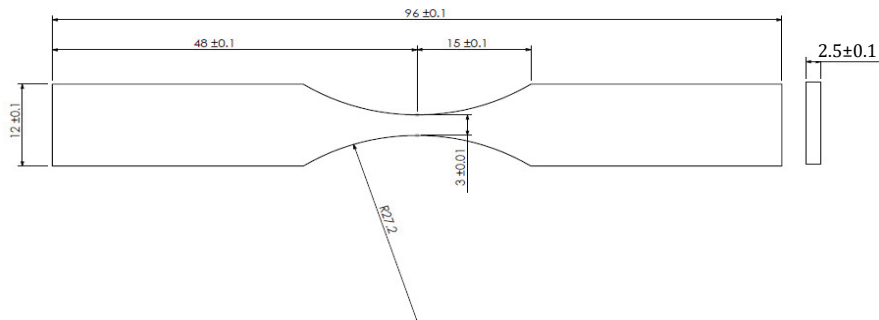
Fatigue test specimen geometry (all dimensions are in mm).
